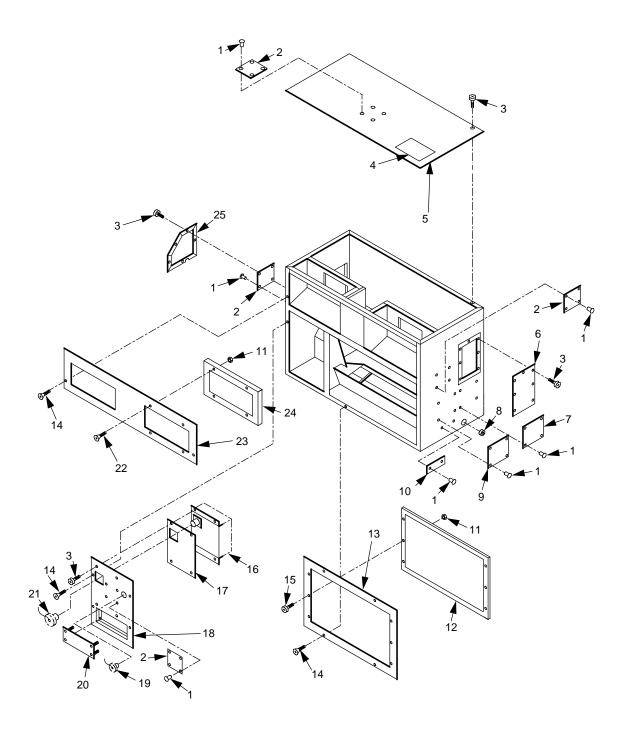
Evaporator Assembly (Sheet 1 of 4)
